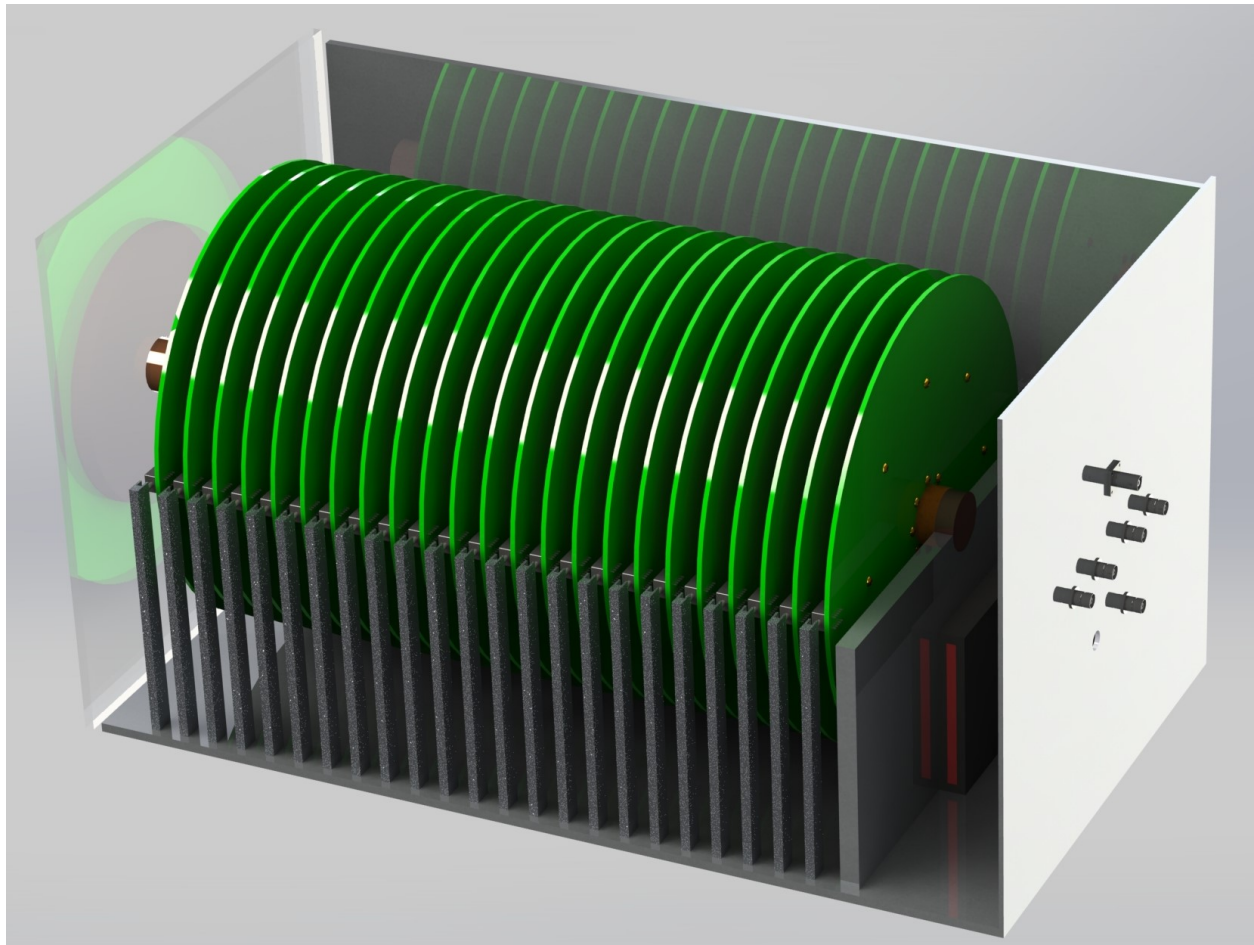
Back view of LTD 23 stage in enclosure with sides cut off
